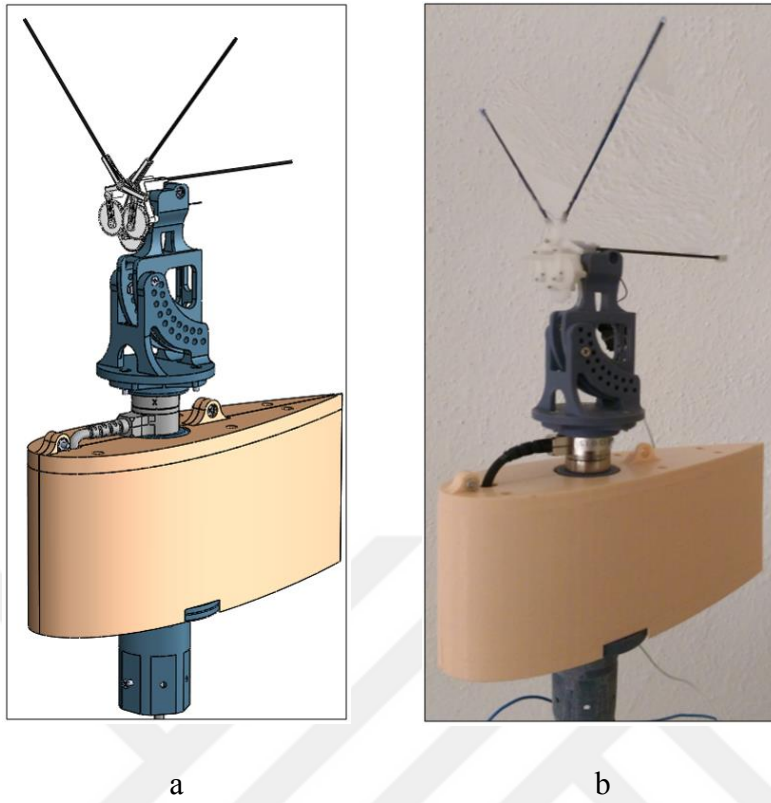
The developed test stand a) 3D Model b) Fabricated
